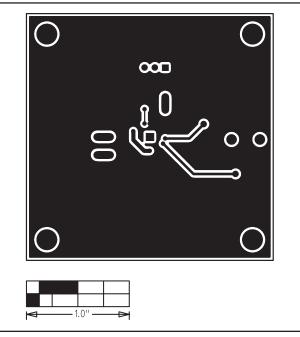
MAX9721 EV Kit PC Board Layout—Solder Side
